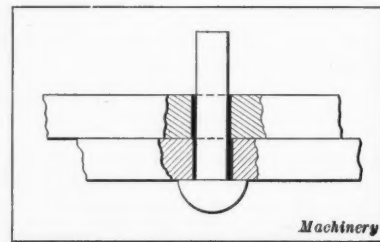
Extreme Case of Difference in Size between Hole in Sheet and Diameter of Rivet—Electric Riveting effectively closes this Clearance Space
